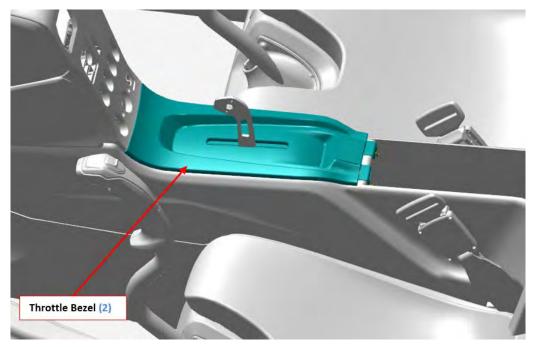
THROTTLE BEZEL REMOVAL
